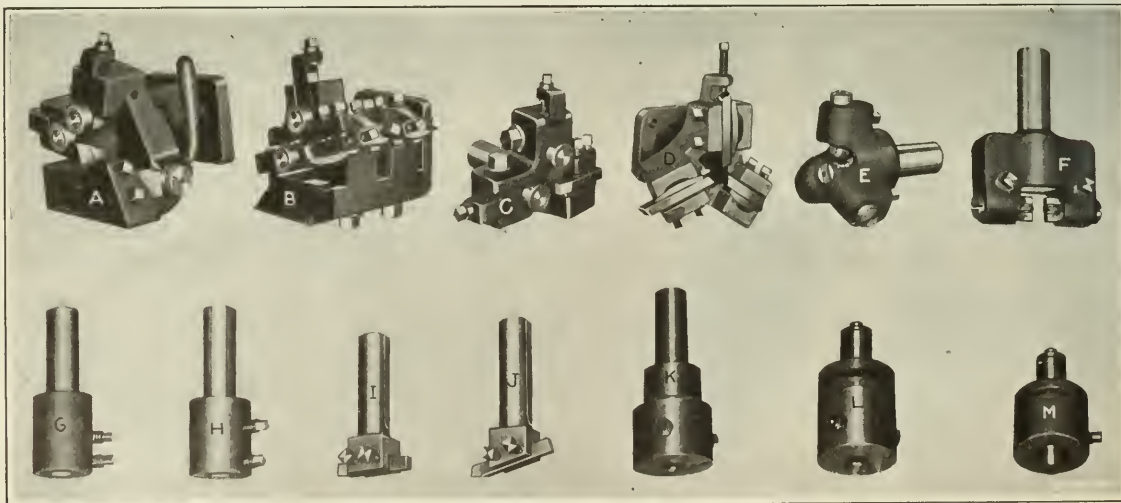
A, Roughing Box-tool; B, Multiple Cutter Turner; C, Pointing Tool; D, Adjustable Hollow-mill; E, Center Drilling Tool; F, Knurling Tool; G to J, Tool-holders; K, Drill-holder; L, Tap-holder; M, Die-holder
